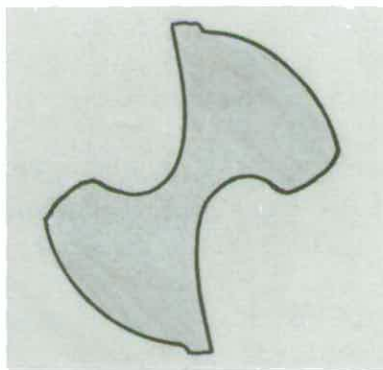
Transverse section through flute of standard U.S. chip breaker drill
